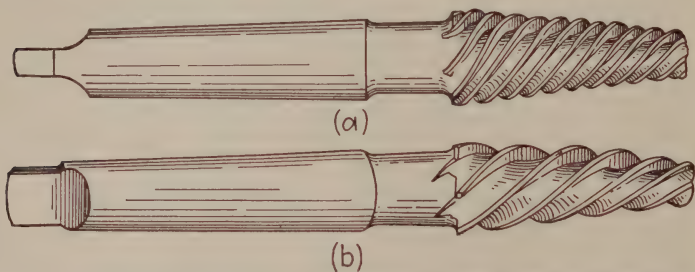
Machine reamers for taper holes. Have steep left-hand spiral teeth. (a) Finishing; (b) roughing.
